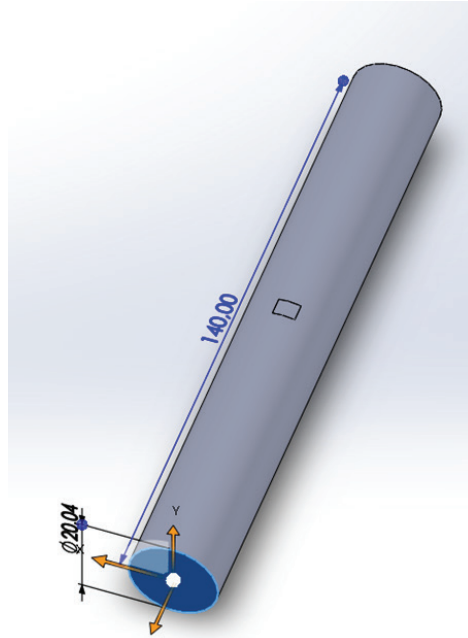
Cylindrical cross-section test specimen rod specification for bending test
